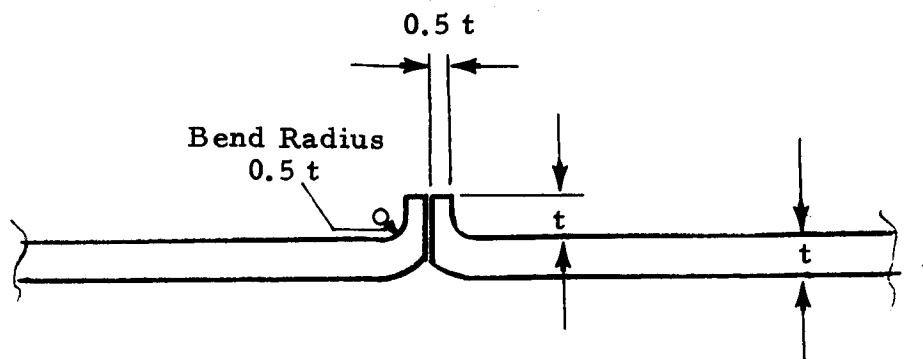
Preparation of Butts for TIG Welding of Transage-129 Titanium Alloy Without Filler Wire (developed by MSFC's Product Development Division, S&E-PE-D, Bldg. 4705)
